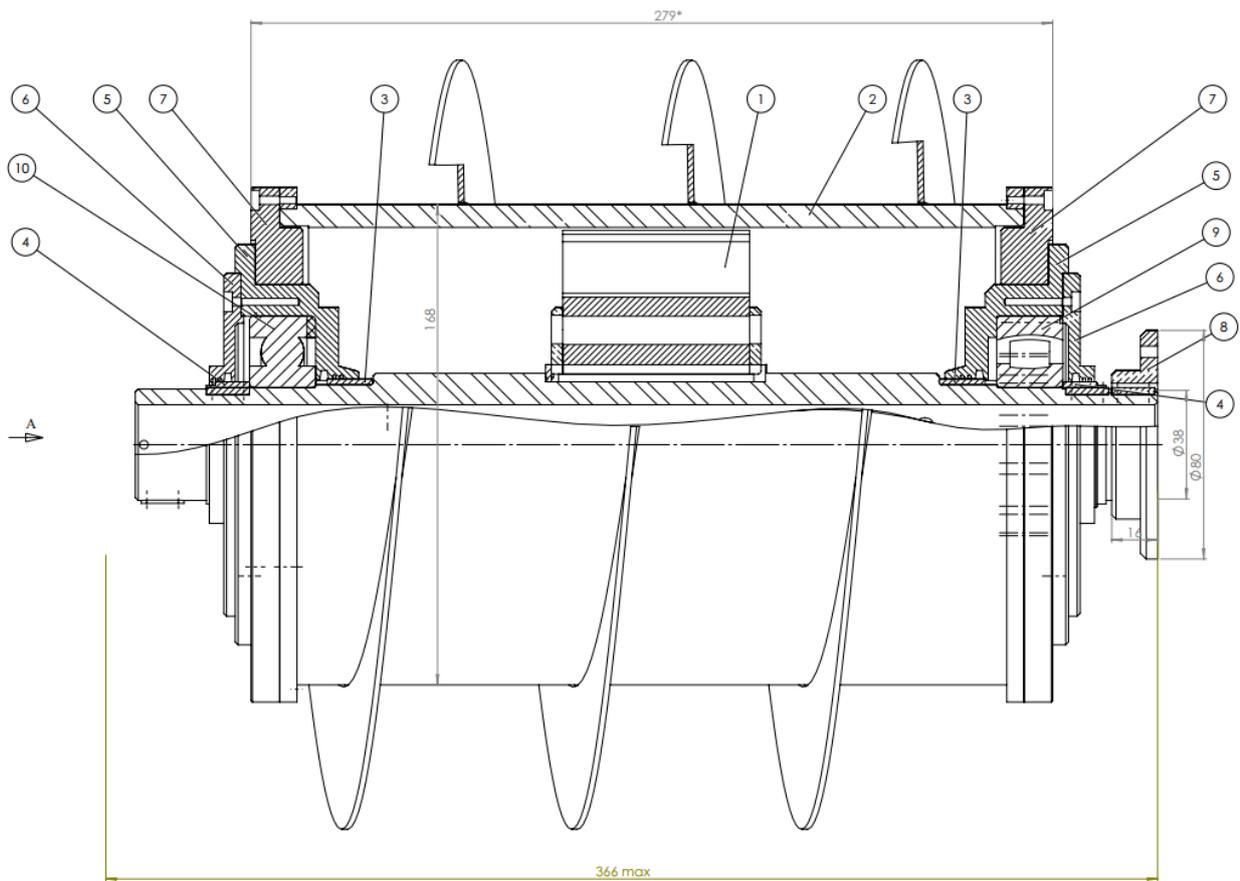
Assembly drawing of a screw-type multifunctional converter (view 1): 1 – stator; 2 – rotor; 3 – sleeve for the capsule; 4 – sleeve under the cover; 5 – capsule; 6 – cover; 7 – shield; 8 – flange; 9 – roller bearing; 10 – ball bearing
